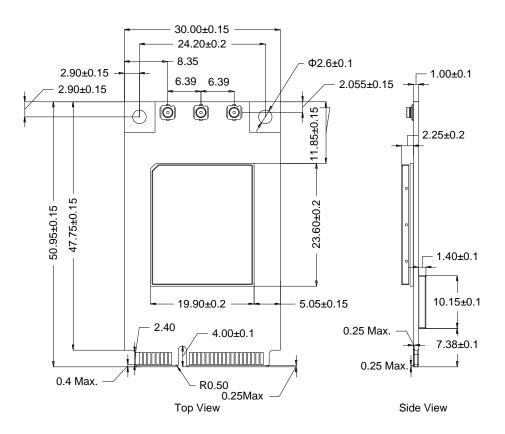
Mechanical Dimensions of BG95-M3 Mini PCle
